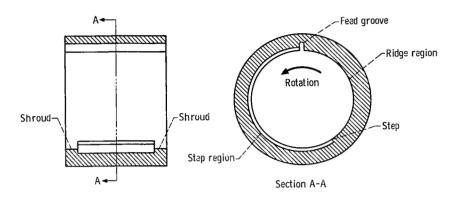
One-segment, one-pad shrouded Rayleigh step journal bearing.
